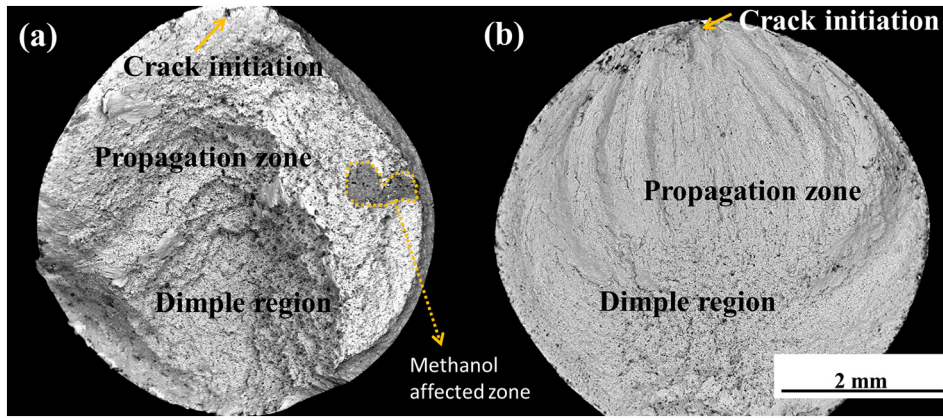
Overall fracture surface of fatigue failed specimens in methanol (a) uncoated and (b) DLC coated.
